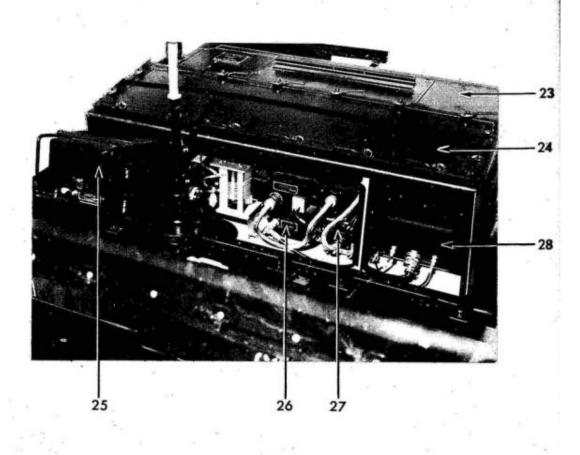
DISMOUNTING EQUIPMENT - STAGE THREE
